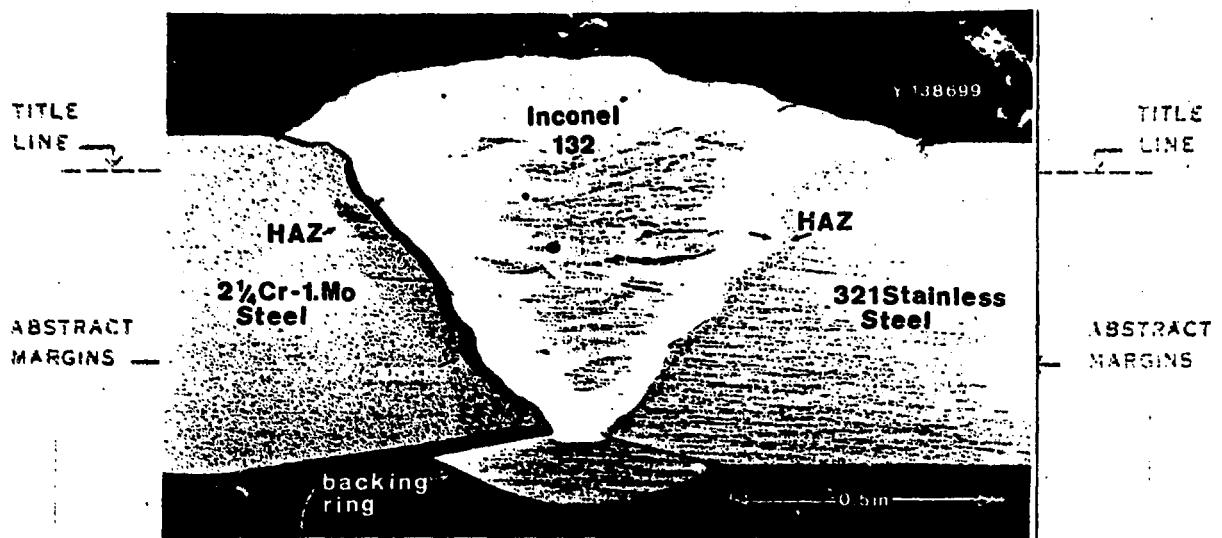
TYPICAL FAILURE FOUND IN FERRITIC STEEL-TO-AUSTENITIC STAINLESS STEEL TRANSITION WELD JOINTS.
